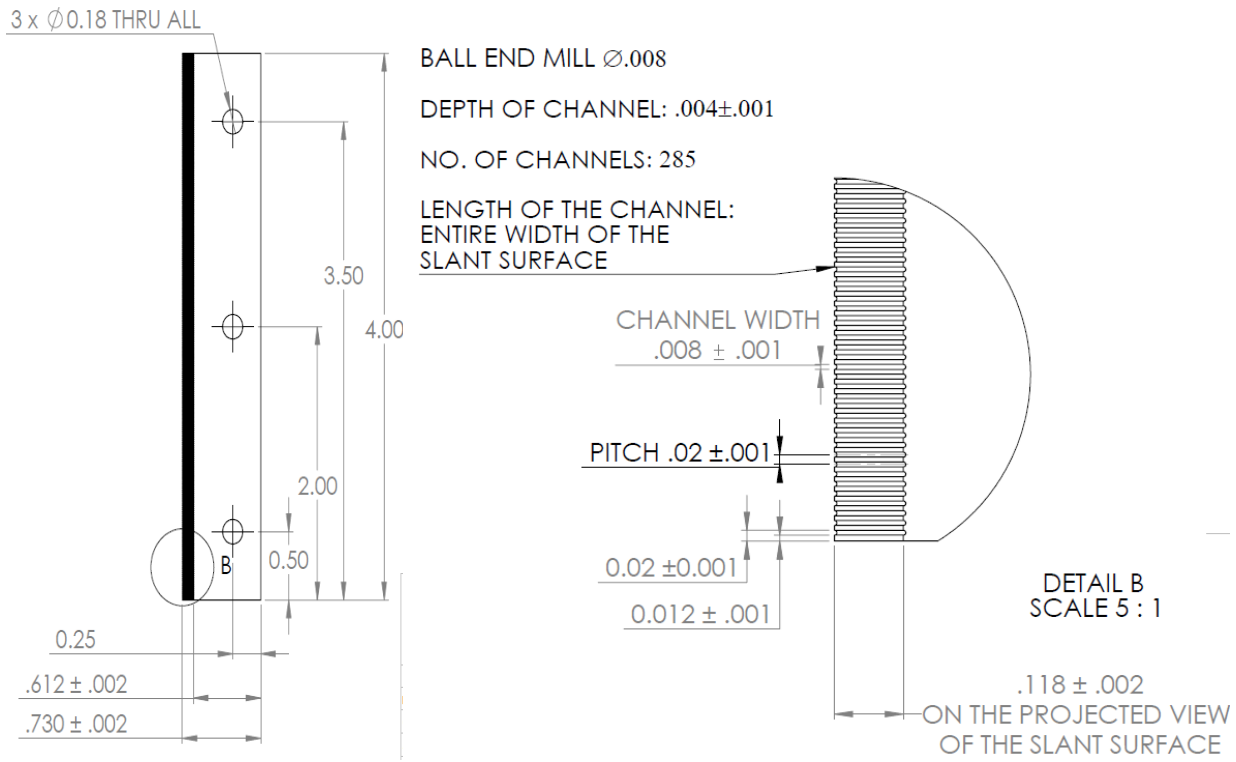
Channel Sidewall with Grooved Surface- Groove Details
